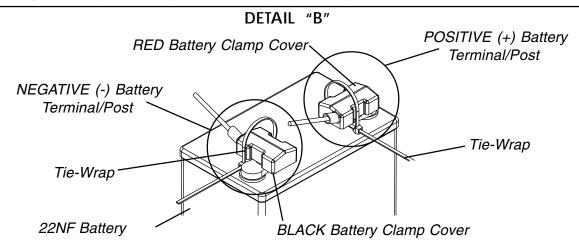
CONNECTING BATTERY CABLES - BATTERY CLAMP METHOD
